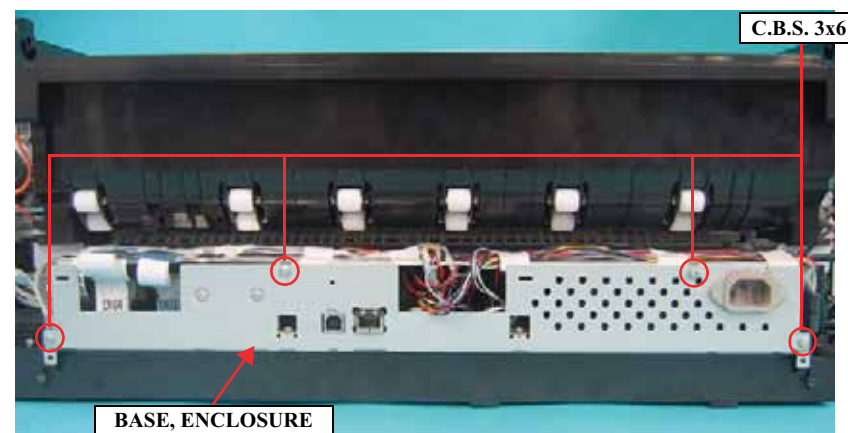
Removing the screws from the BASE, ENCLOSURE
